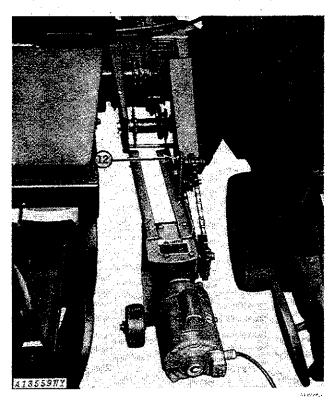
Chain Shield Pivoted Back for Access to Chain and Idlers
